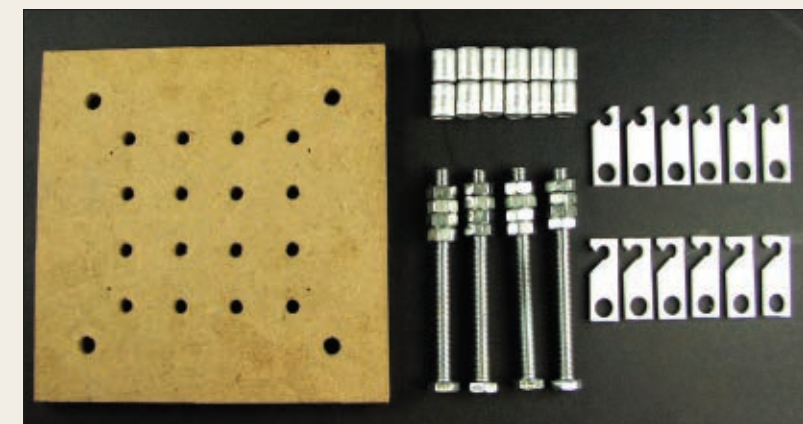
Jig kit including wood base, LED holders, spacers, nuts, and bolts.
